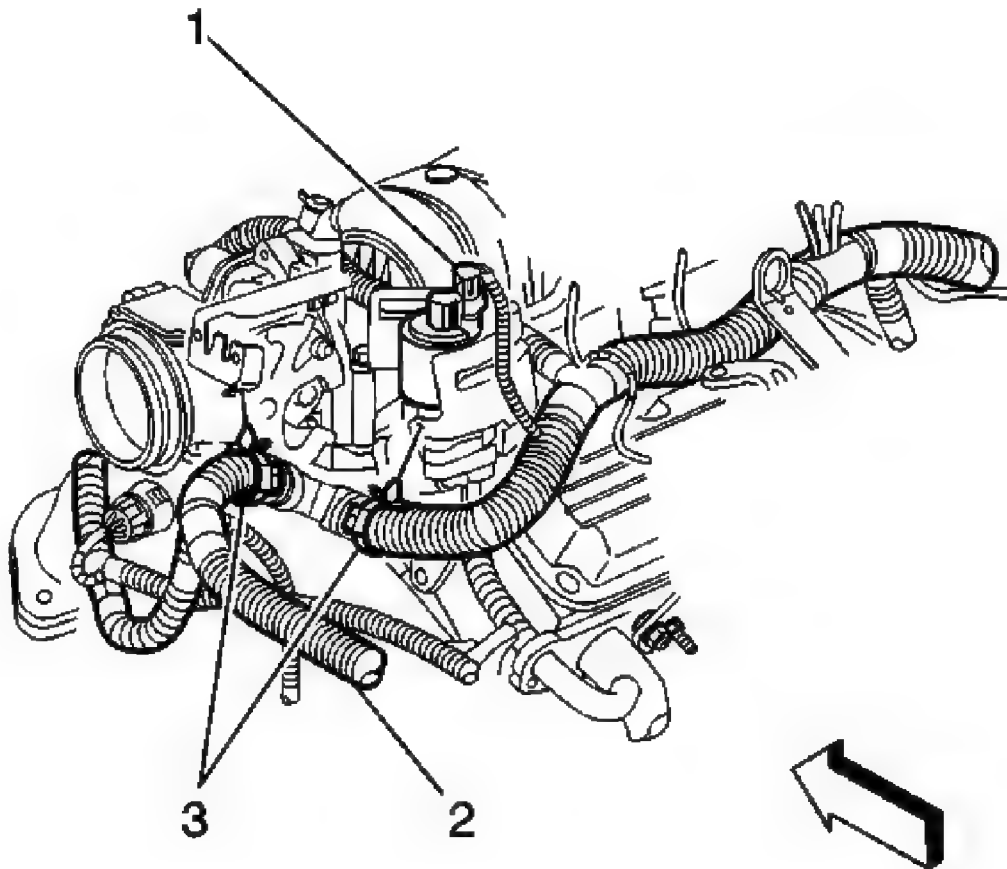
View of EGR Valve, Engine Harness Clips & Wiring Harness
